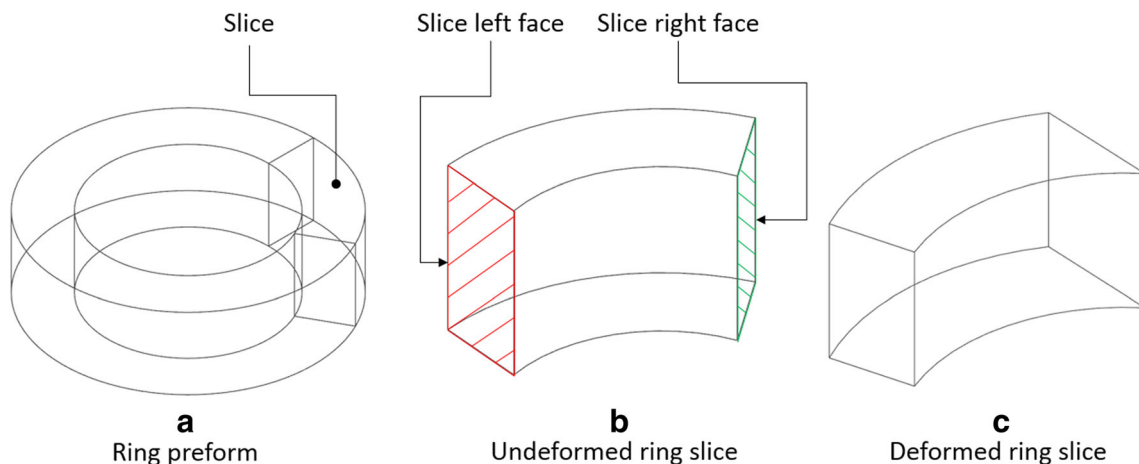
Ring blank geometry (a), ring slice geometry from the ring blank (b) and deformed ring slice (c)
